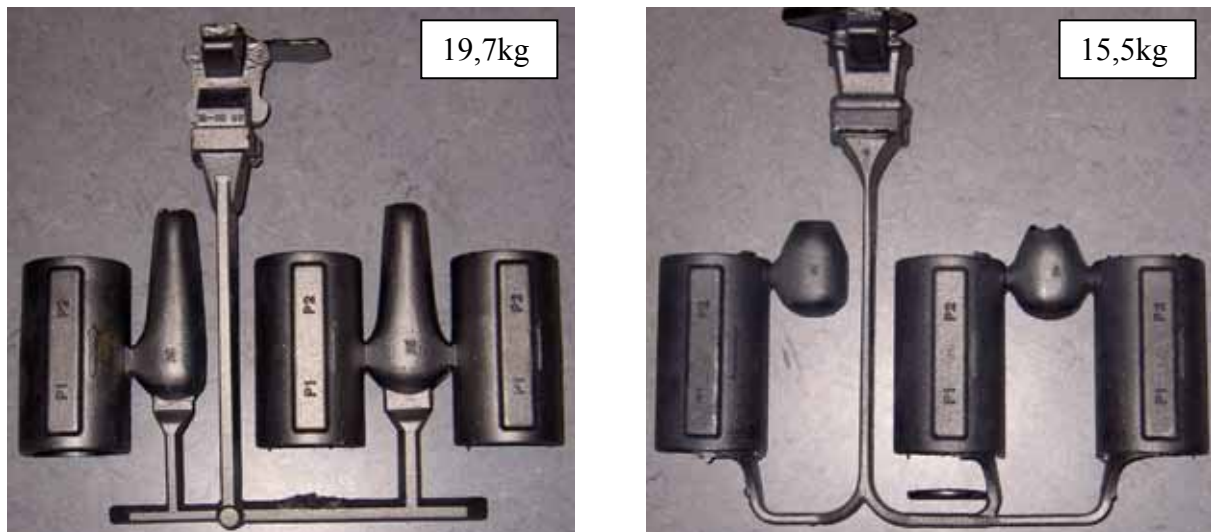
Picture to the left: castings with the traditional layout. Picture to the right: castings with the streamlined layout.
